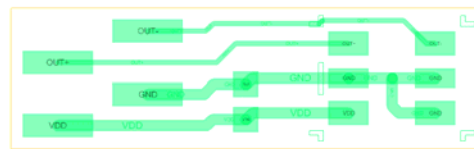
EV_ICS-40619-FX Board Layout (Top View)
